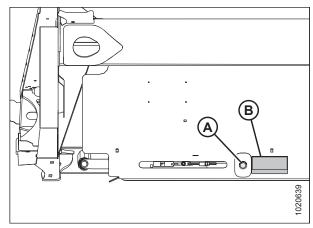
Draper Tensioner (Left Side Shown, Right Opposite)
